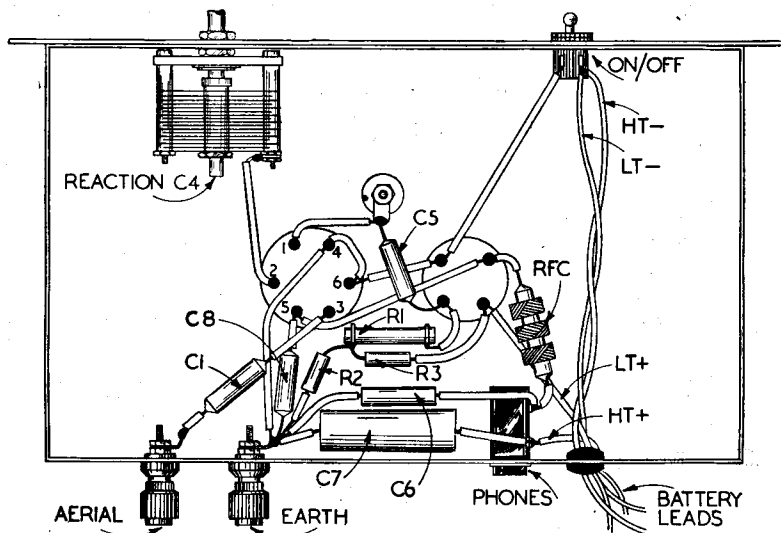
Under chassis view showing wiring. Note that the aerial terminal must be insulated from the chassis, whereas the earth terminal is not
